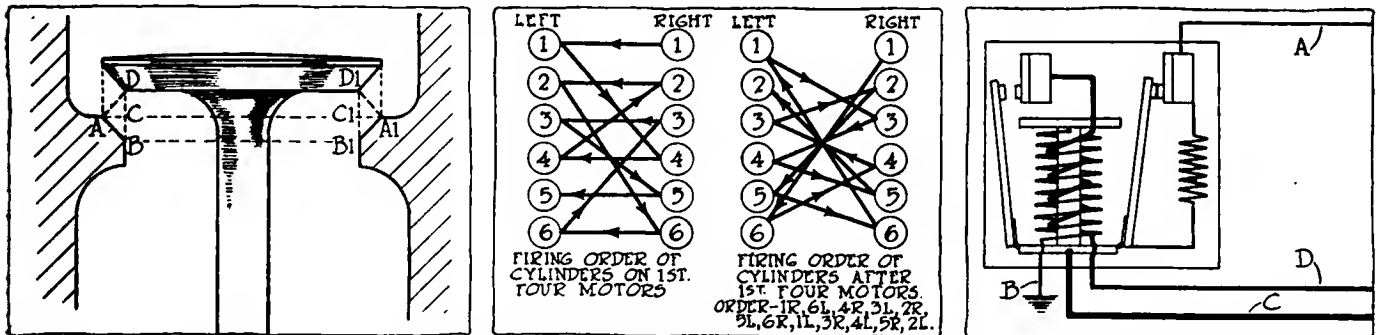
Left—Diagram referring to method of calculating clear opening of a valve; center, firing order of Pathfinder twelve motors; right, control system used with 1916 Heinze generator
